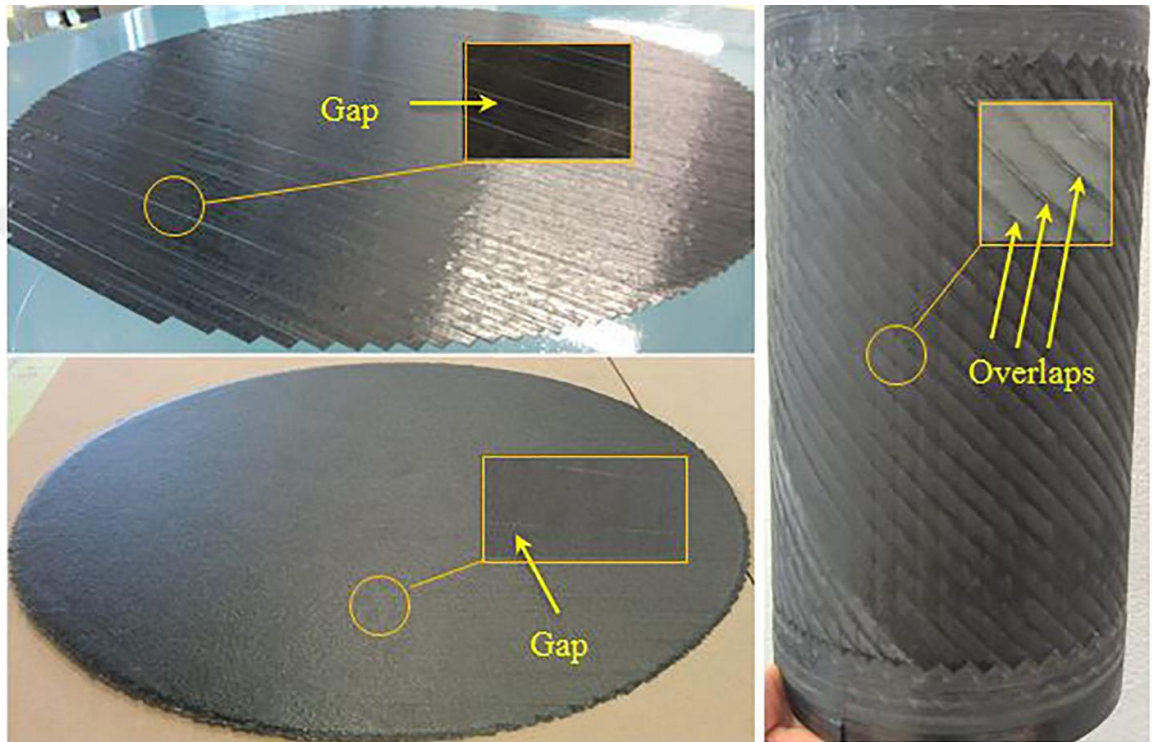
An example of gaps and overlaps during automated fiber placement.
